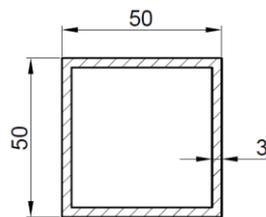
Cross-section of a beam that strengthens the fastening of the central pillar
